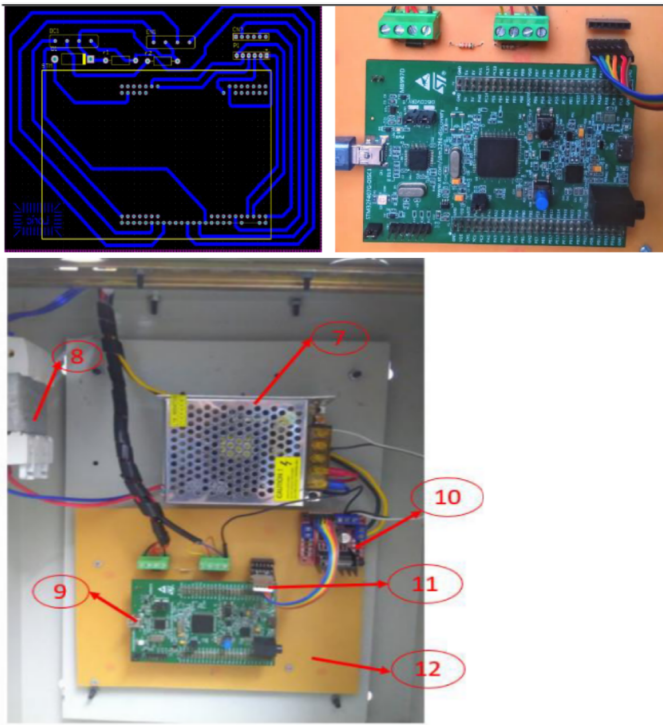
Hardware integration details: (a) PCB and STM32F407 board and (b) electronics enclosure interior. (8) NISCA NF5475 brushed DC motor, (9) STM32F407, (10) L298N H-bridge motor driver, (11) CP2102 USB-UART, (12) PCB.
